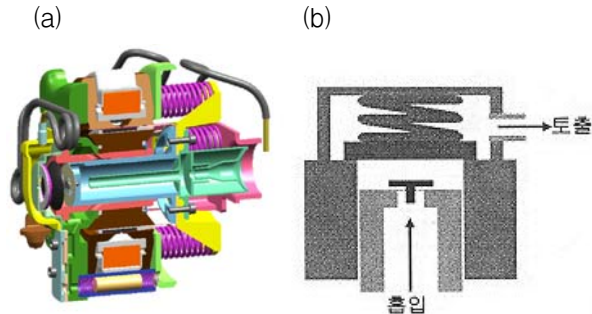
(a) Shape of linear compressor (b) Mechanism of suction and discharge of linear compressor
